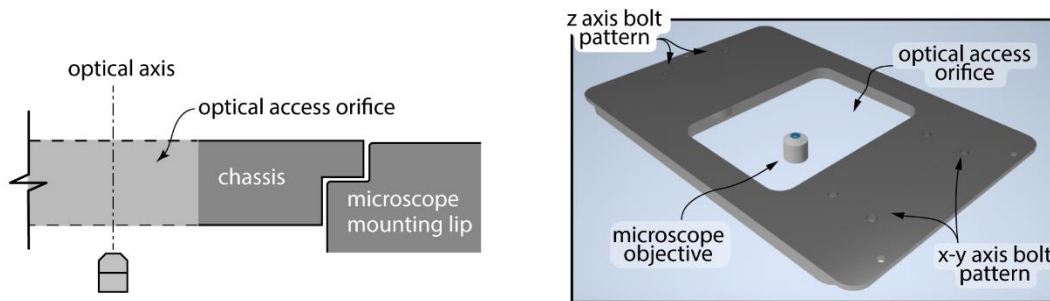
side view cutaway illustration of optical axis through access orifice with isometric rendering of chassis with microscope objective seen through optical access orifice
